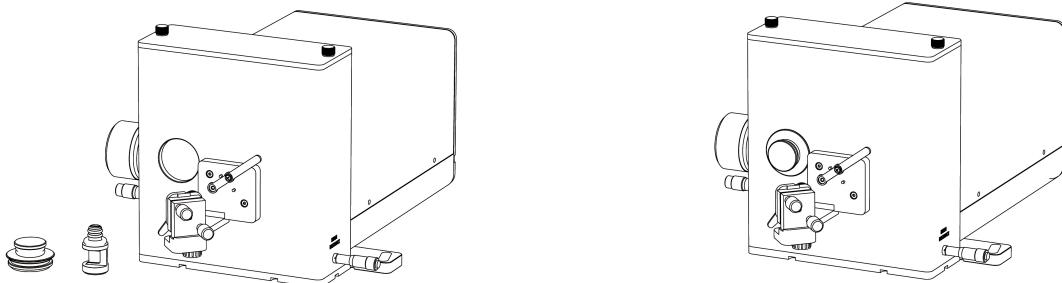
Optical Head and crystal module (left - removed; right - installed)
